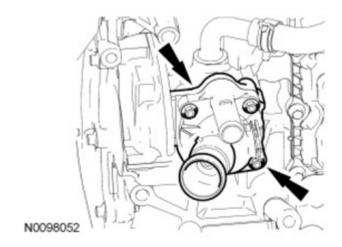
Locating Thermostat Housing Courtesy of FORD MOTOR CO.
